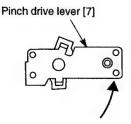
(Bottom side of Mechanical Deck)
